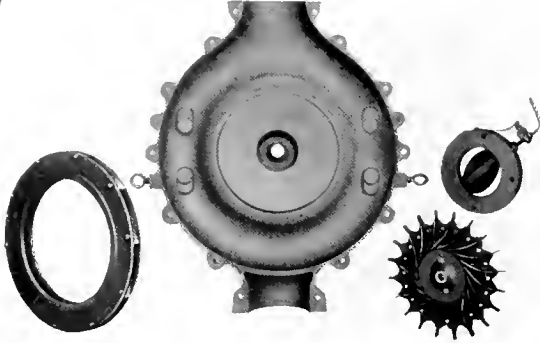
The Parts of a Single-Stage Centrifugal Compressor
